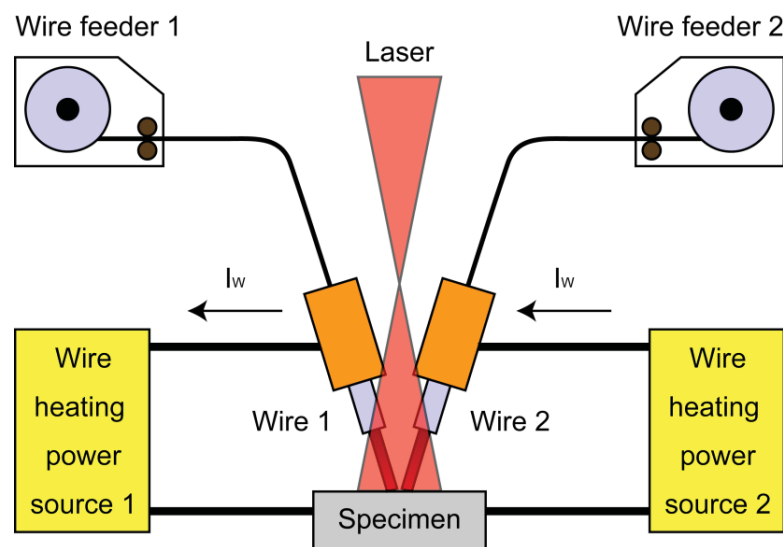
Schematic illustration of two hot wire-laser welding system.
